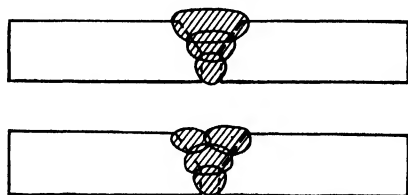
Two methods of depositing beads in multiple-pass groove welds.
